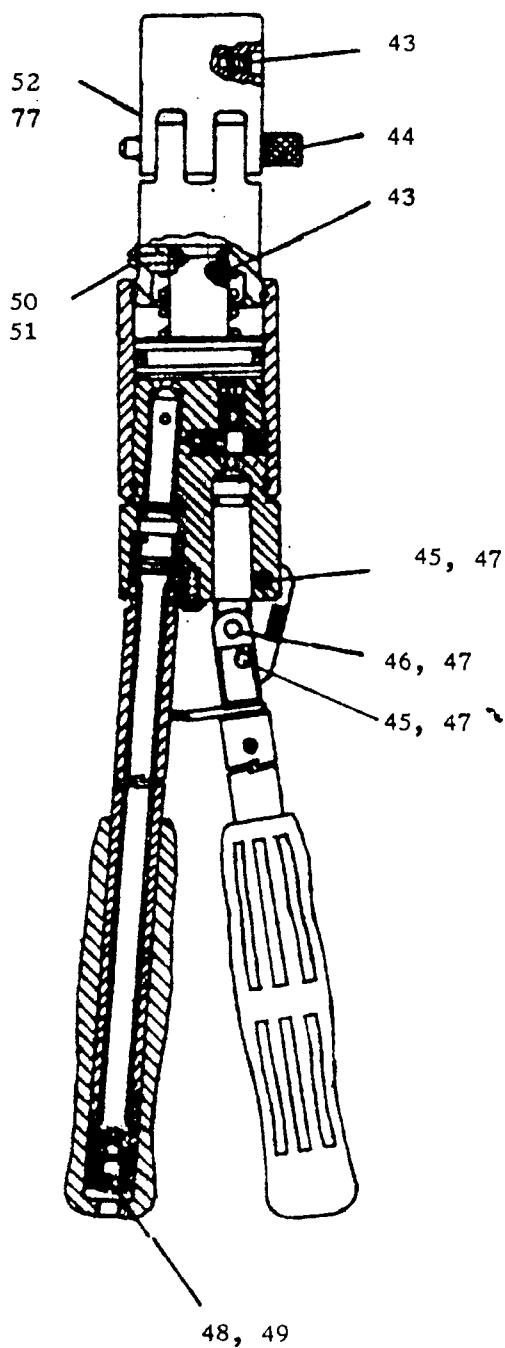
Hand Ratchet PIDG Tool 39/8127 and 8146
